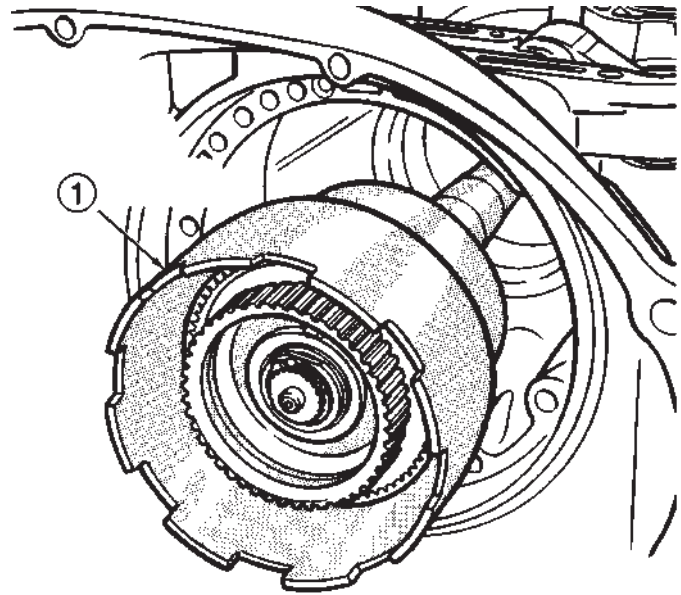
Removing Planetary Geartrain And Intermediate Shaft Assembly
